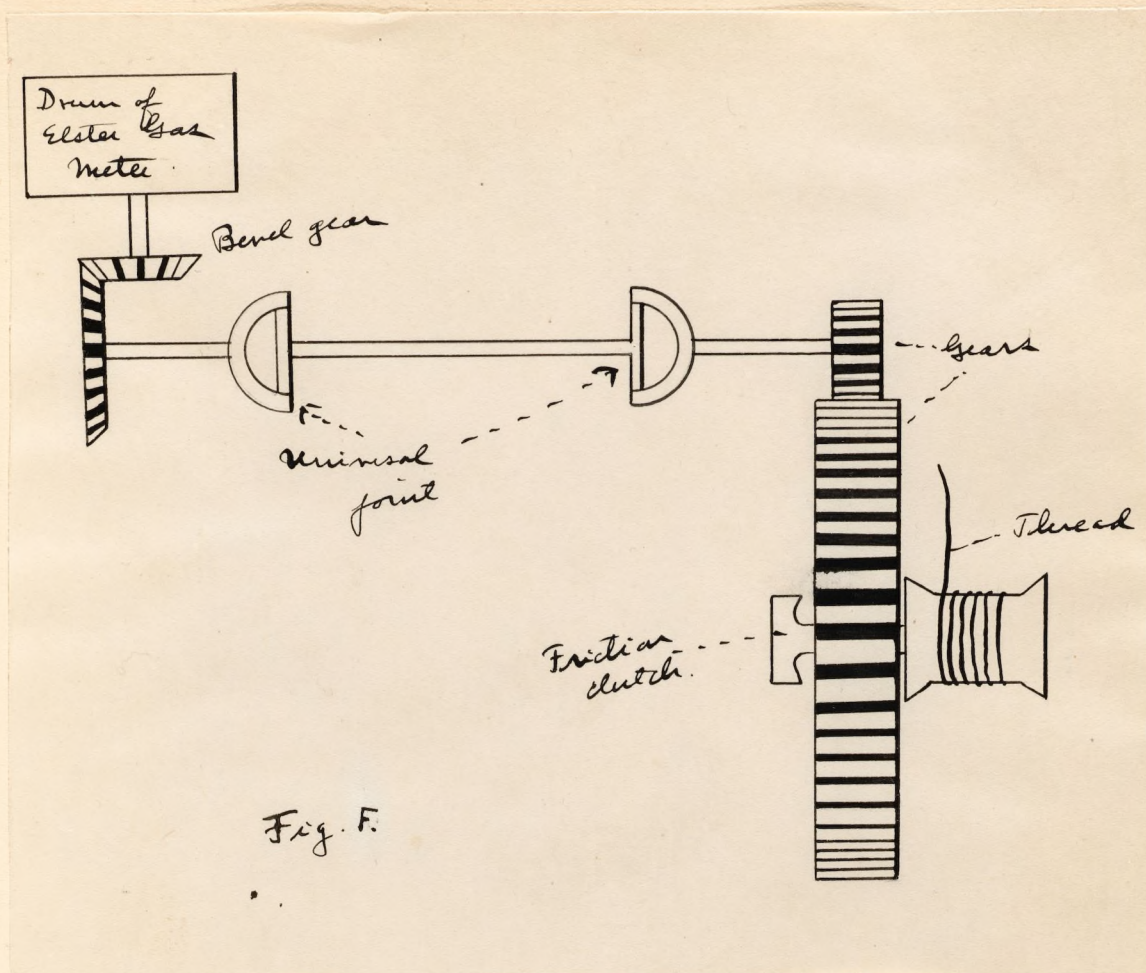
Fig. F. Scheme of bevelled gears for lowering the collection pipette in Jaquet's apparatus, Basel.
